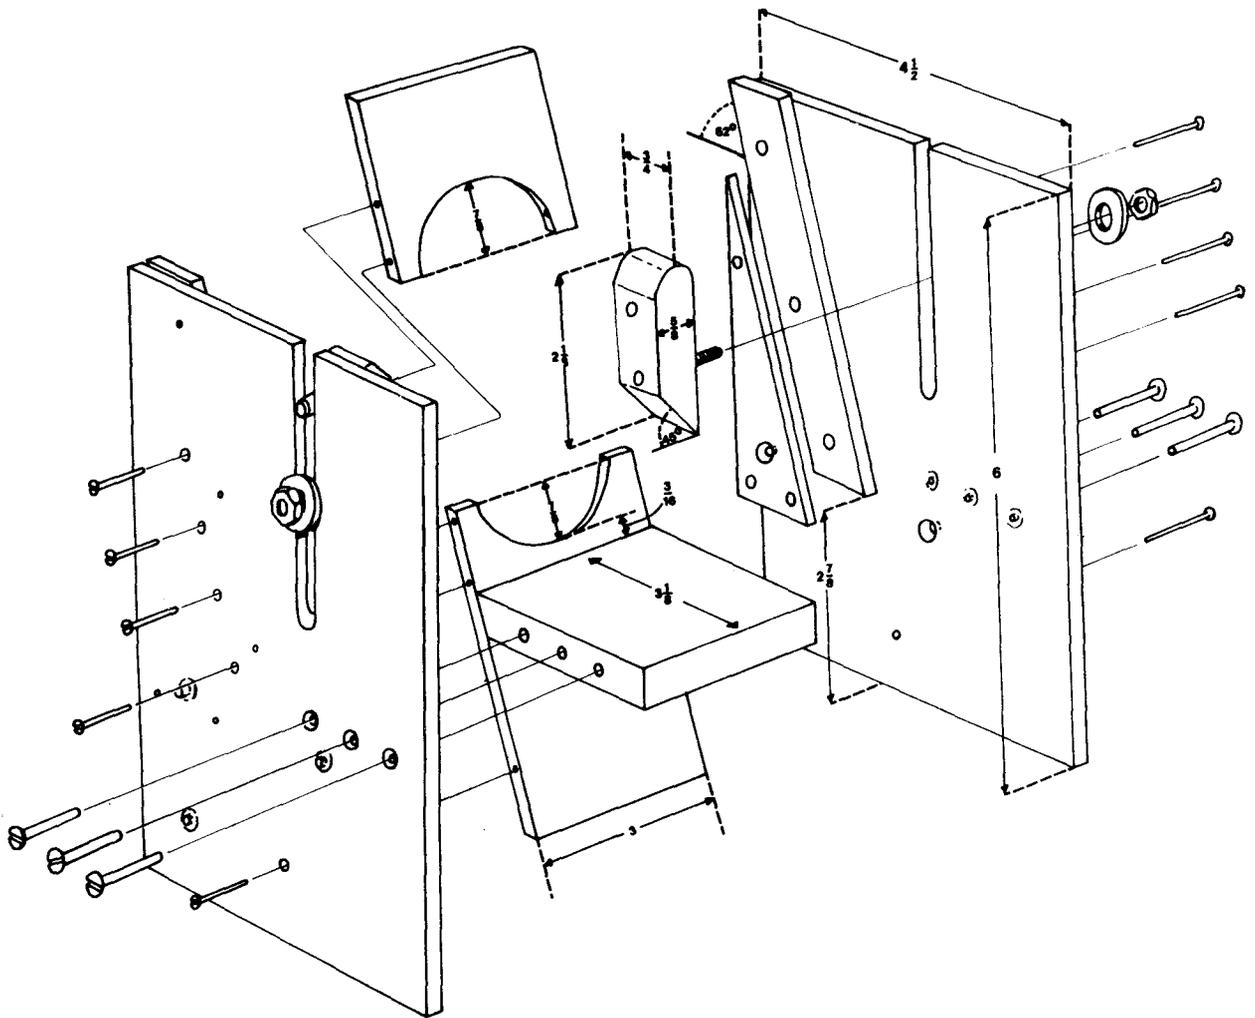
Exploded view of head restraint for chronic cats. Dimensions will vary with age and sex of the cat.
